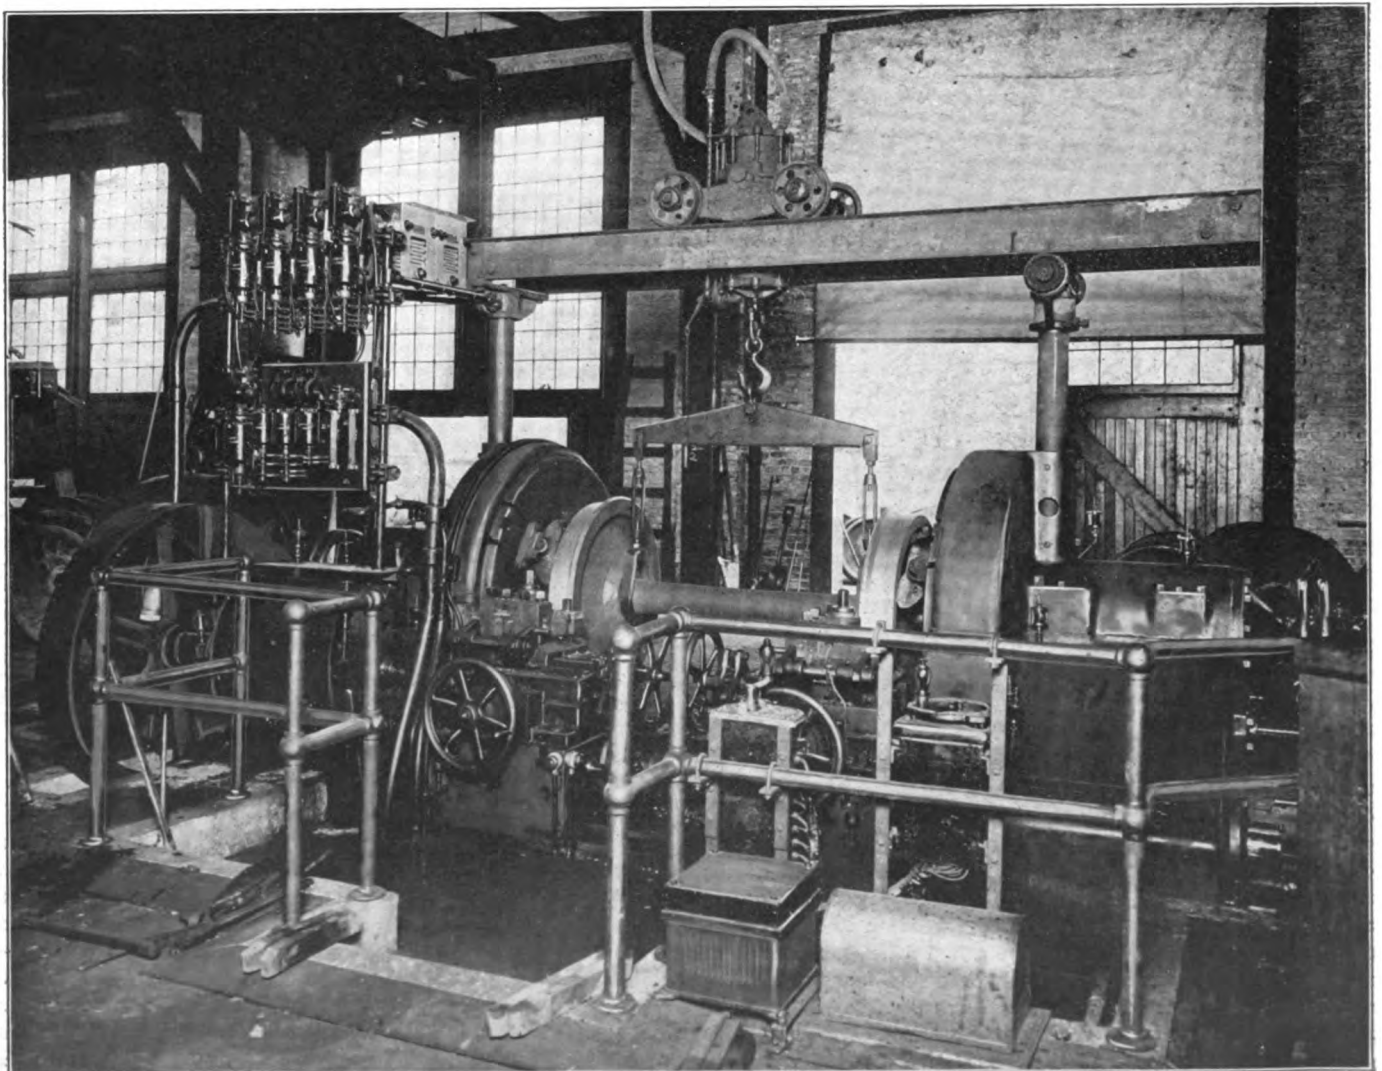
42-Inch Motor Driven Car Wheel Lathe.
